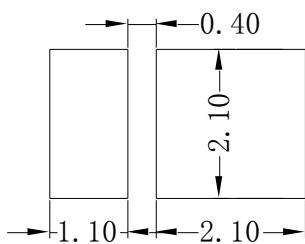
Soldering patterns 堆焊焊盘
